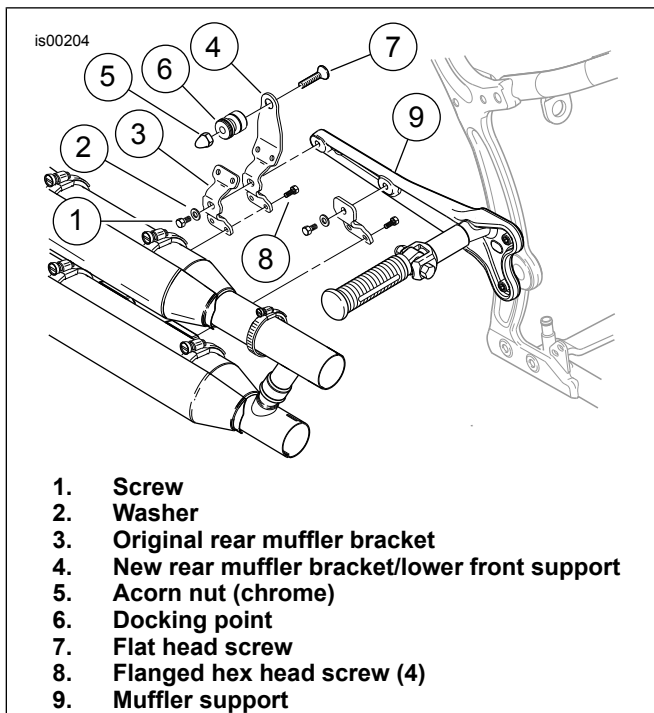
Lower Front Saddlebag Support (Right Side With Shotgun Exhaust)
